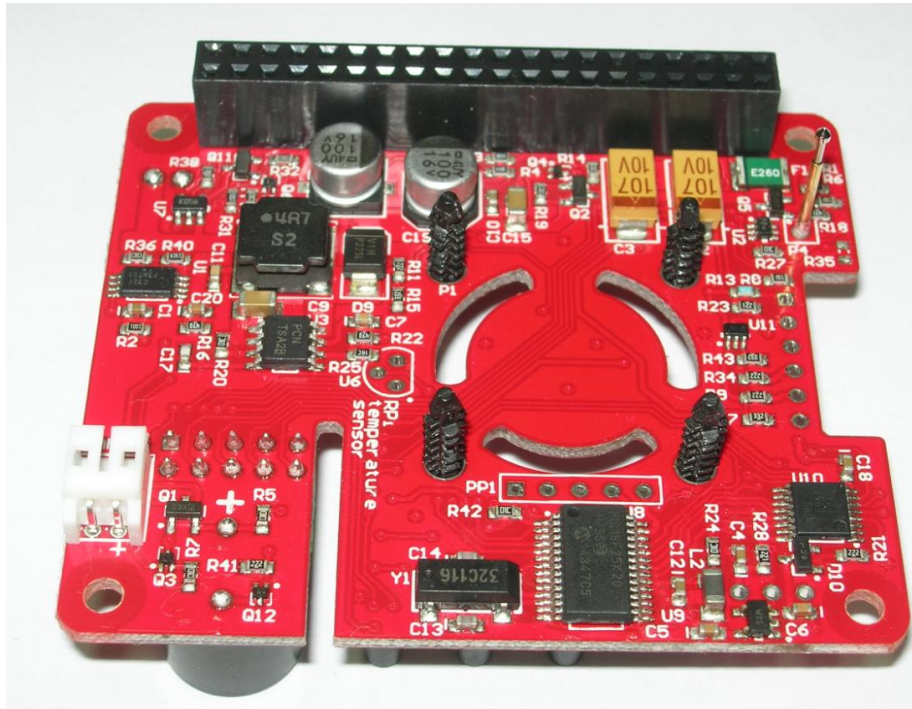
Tree clips placed on the UPS Pico PCB bottom side
